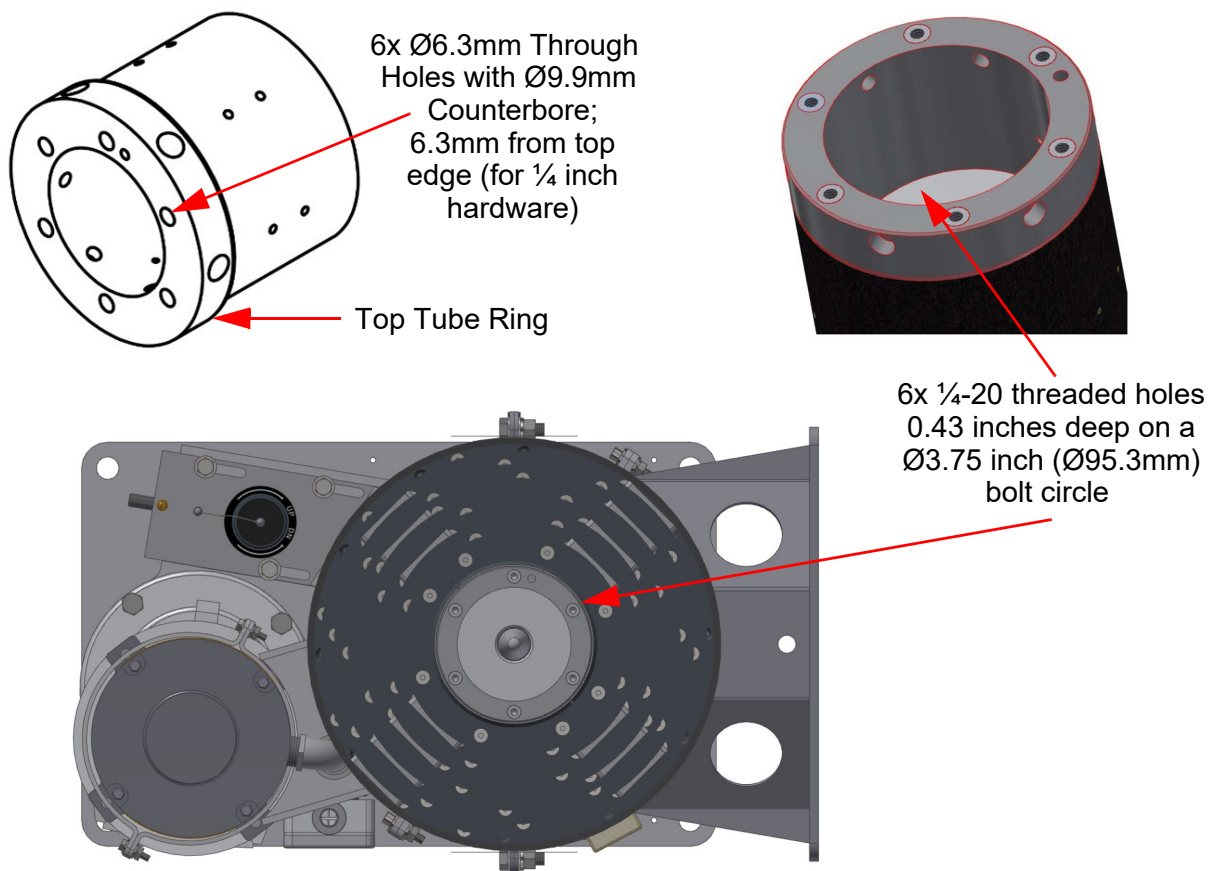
Top Tube Ring (4-Meter Stiletto P/N: 711290461 Shown)
